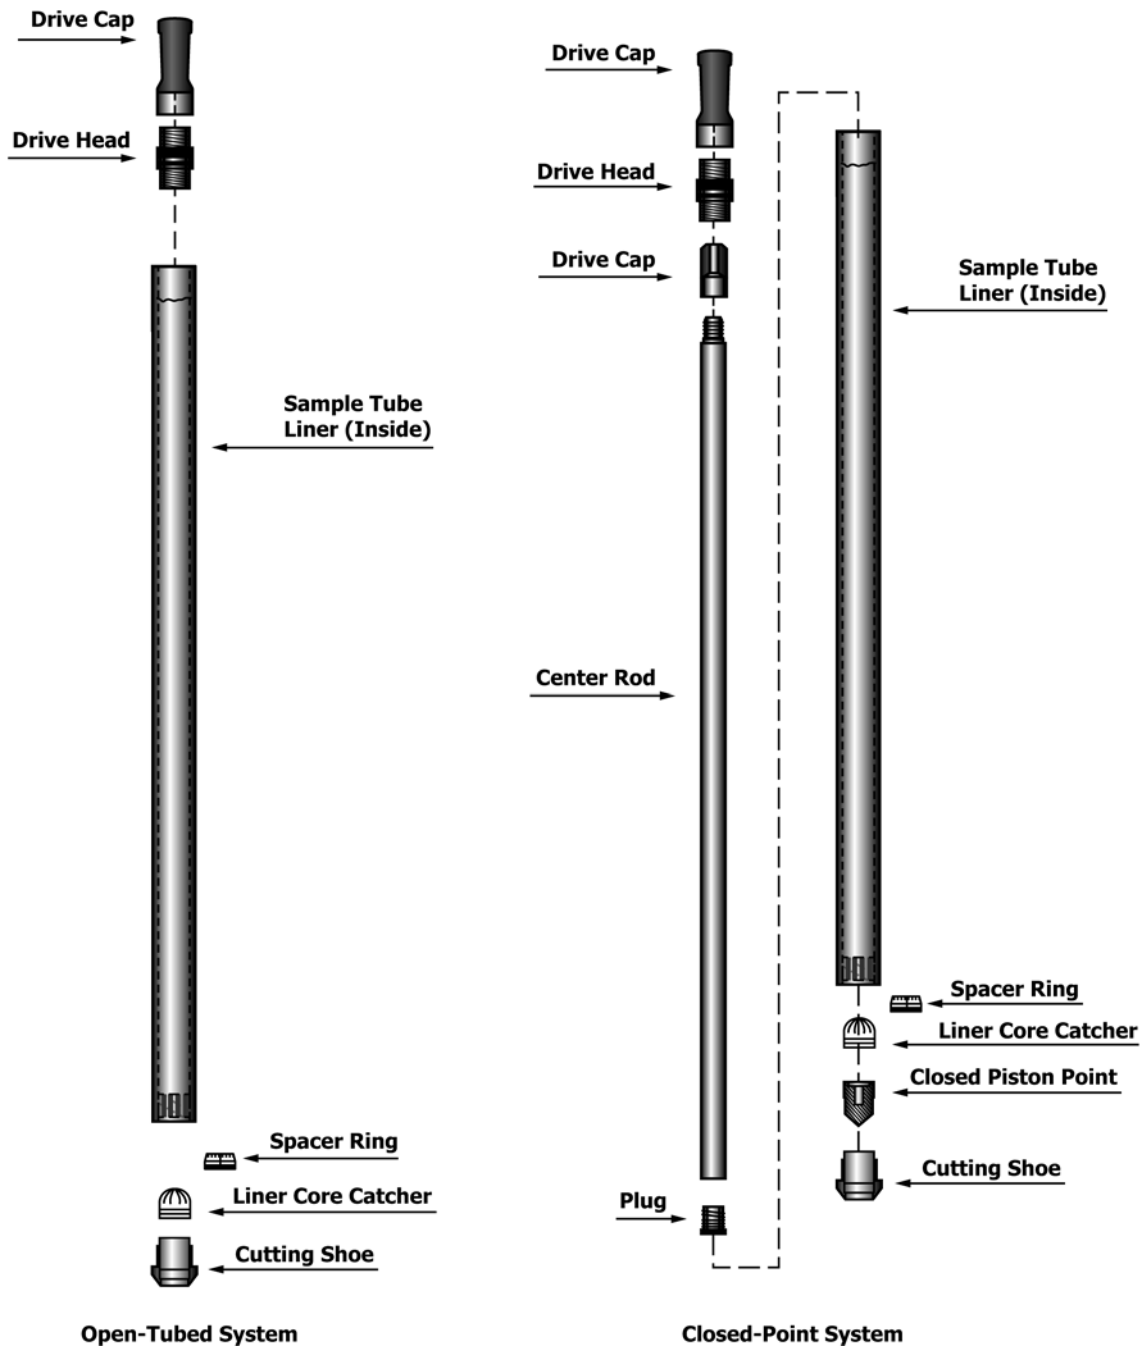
Typical Single Tube Sampling System Used in Either Open Tube or Sealed (Closed) Piston Point
